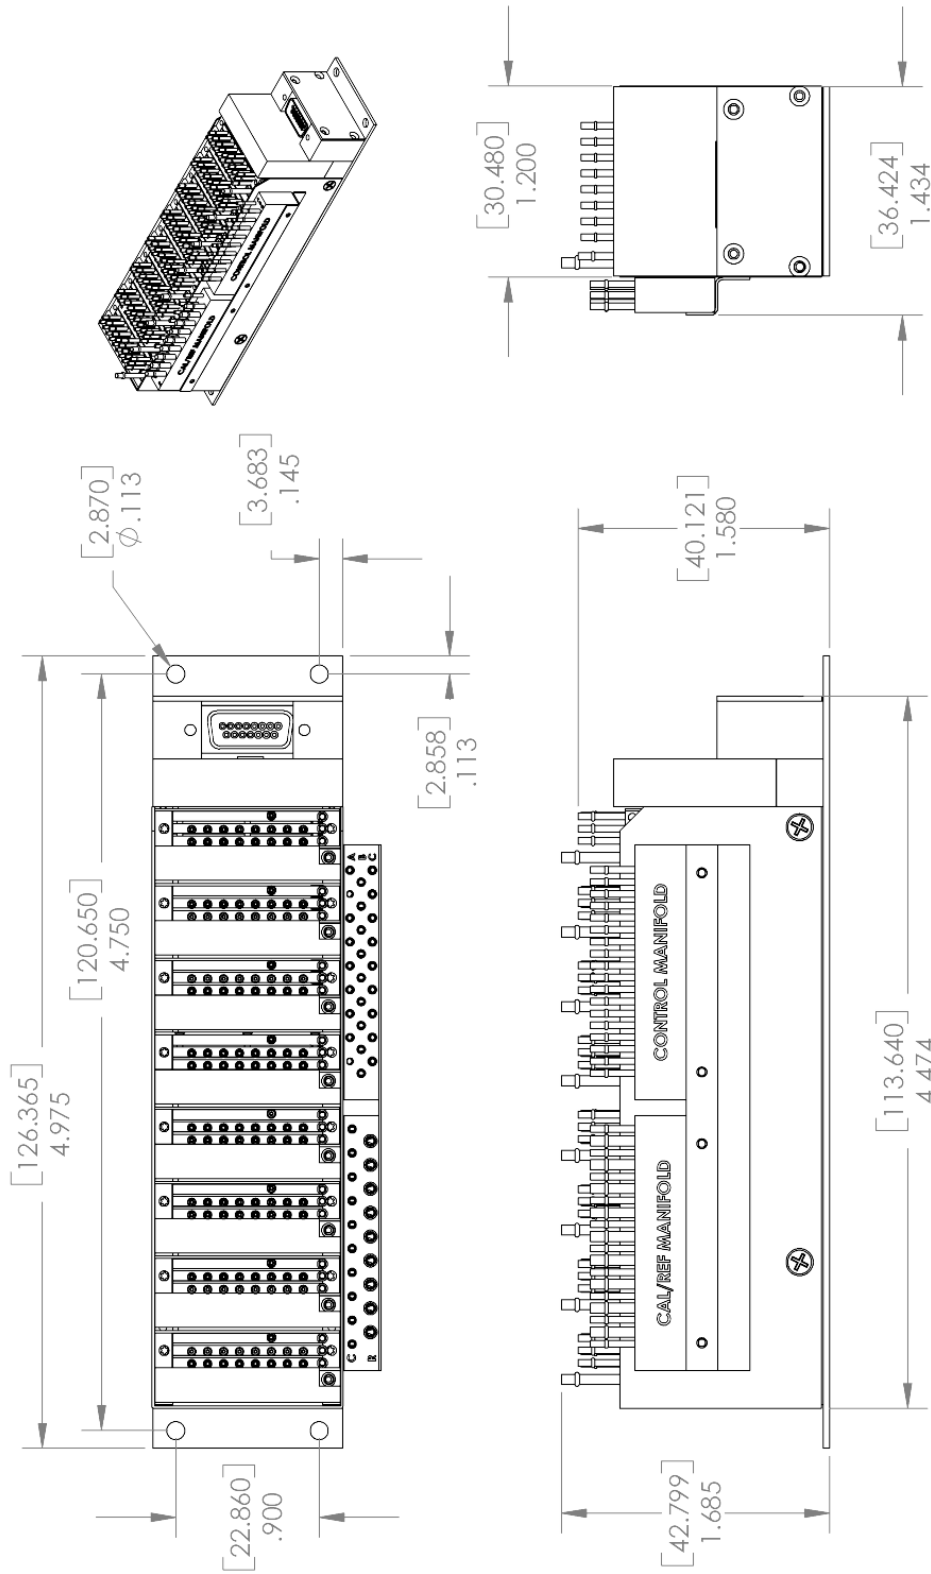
ZOC33/64PXX2 DIMENSIONS [INCHES(MM)]
